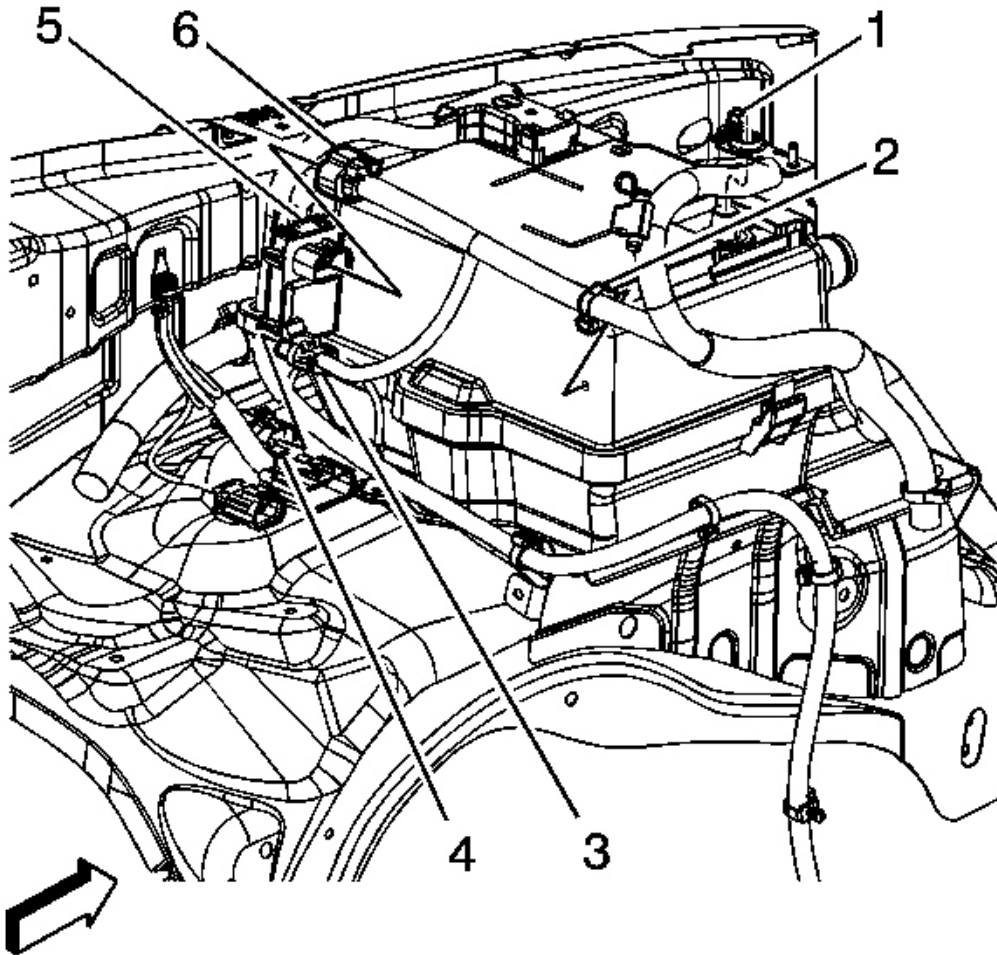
Engine Wiring Harness Electrical Connector & Battery Current Sensor
